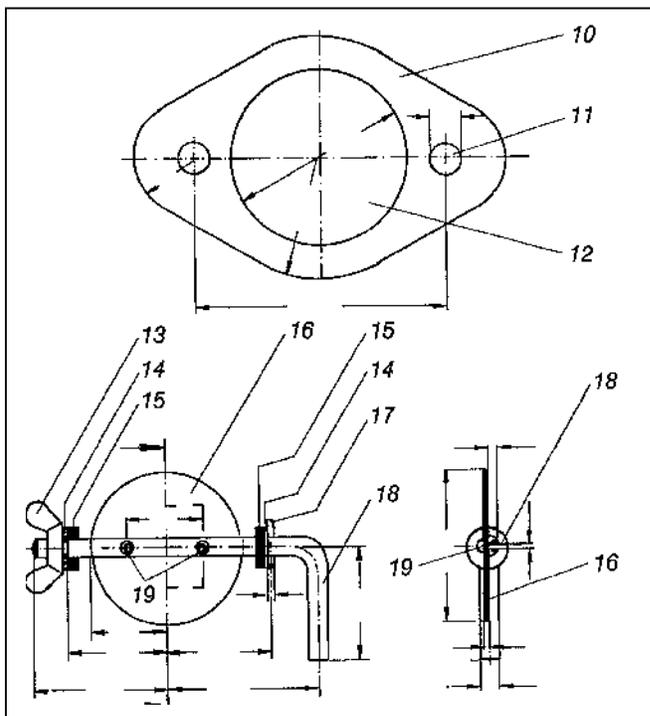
Venturi mixer parts, continued. 10 Connection flange, 11 Bore for connection bolts to engine and air filter, 12 Bore for connection of mixer body (brazed, welded), 13 Wing nut for fixing the butterfly valve shaft, 14 Washer, 15 Rubber/plastic seal ring, 16 Butterfly valve, 17 Washer fixed to butterfly valve shaft, 18 Butterfly valve shaft cum control lever, 19 Small bolts for fixing butterfly to shaft.
